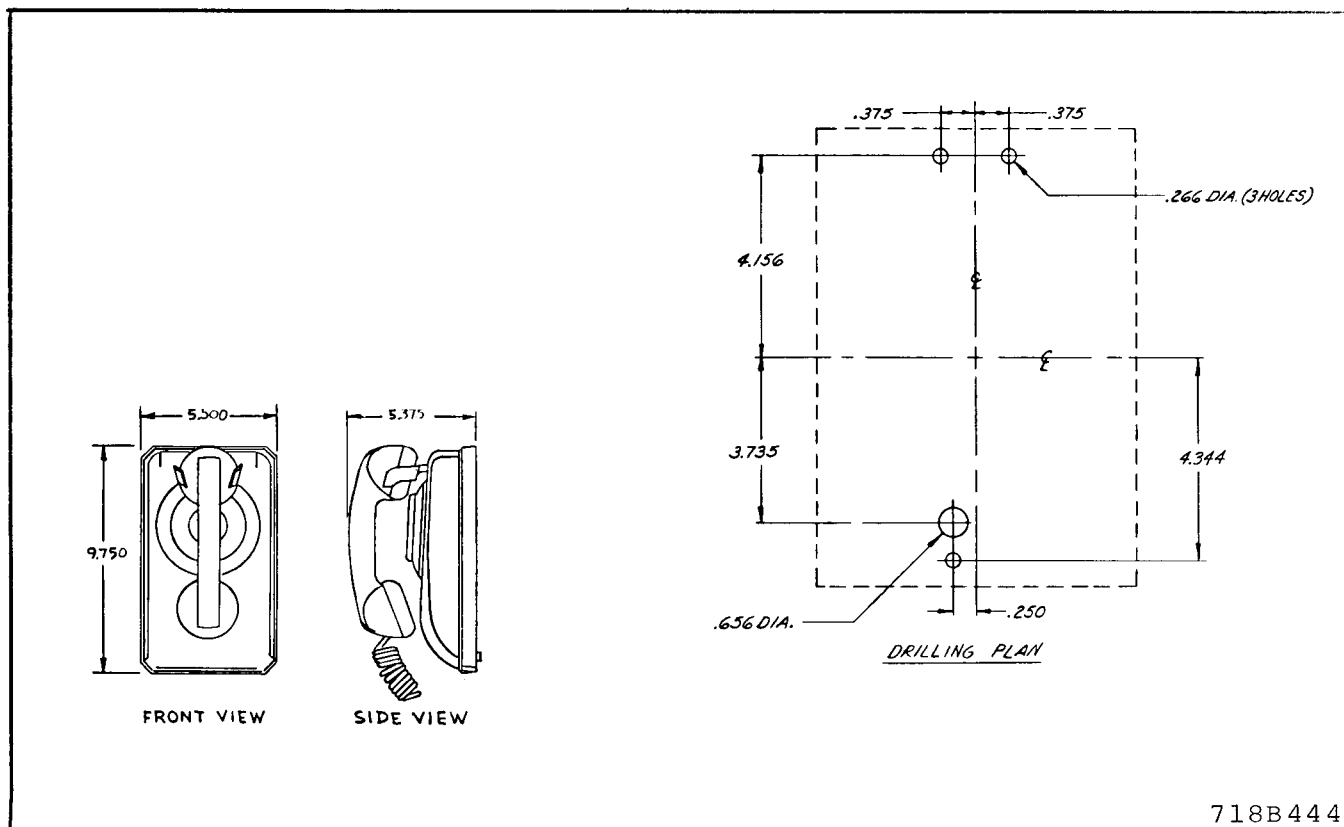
Mounting Dimensions for wall mounted Hookswitch- Handset Assembly
